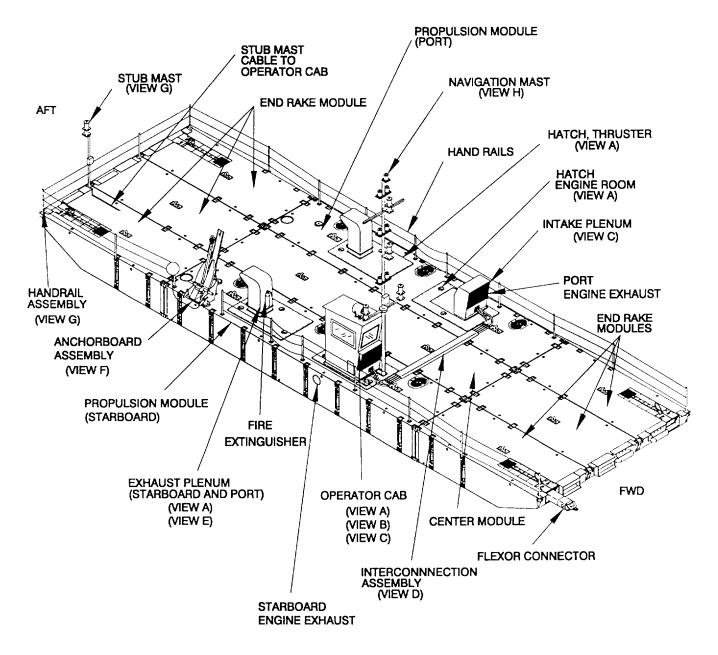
Propulsion Module/Powered Section Assembly. (Sheet 1 of 11)
